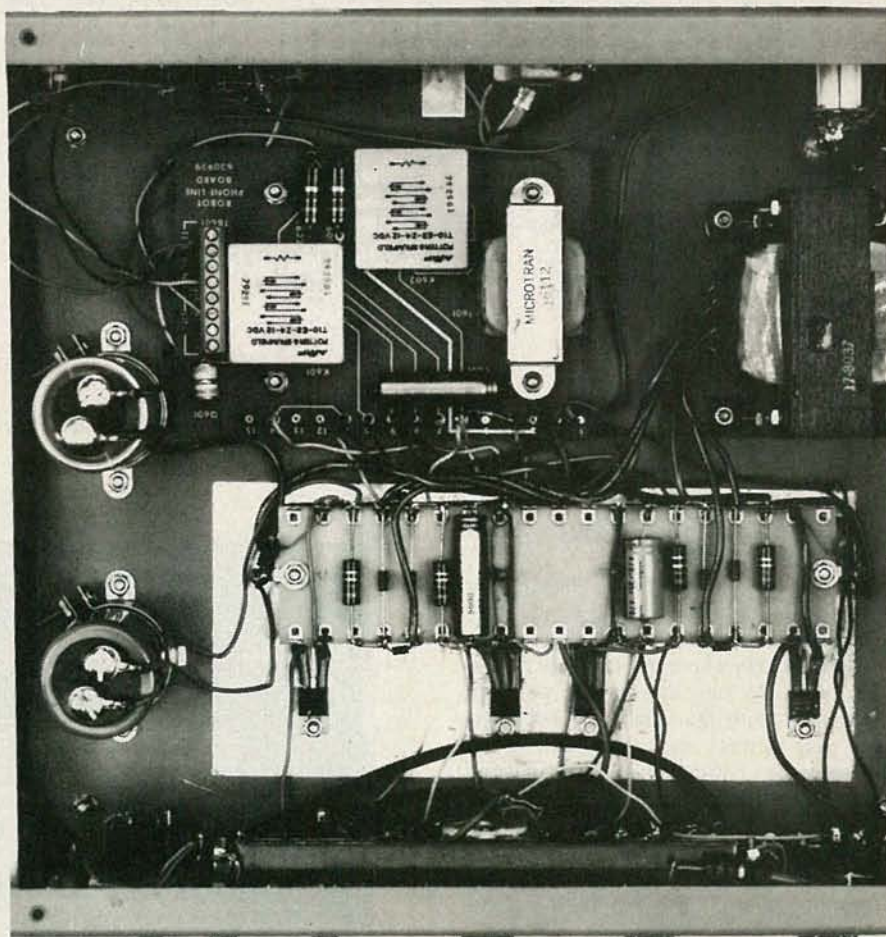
POWER SUPPLY and associated components. Bottom of enclosure is used as heat sink for regulators.
